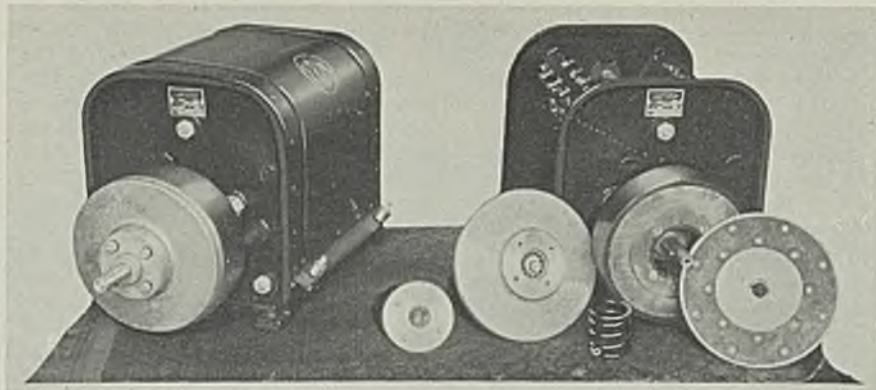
Completely assembled and exploded views of rotating cam limit switch with spring-set, magnetically-released clutch
